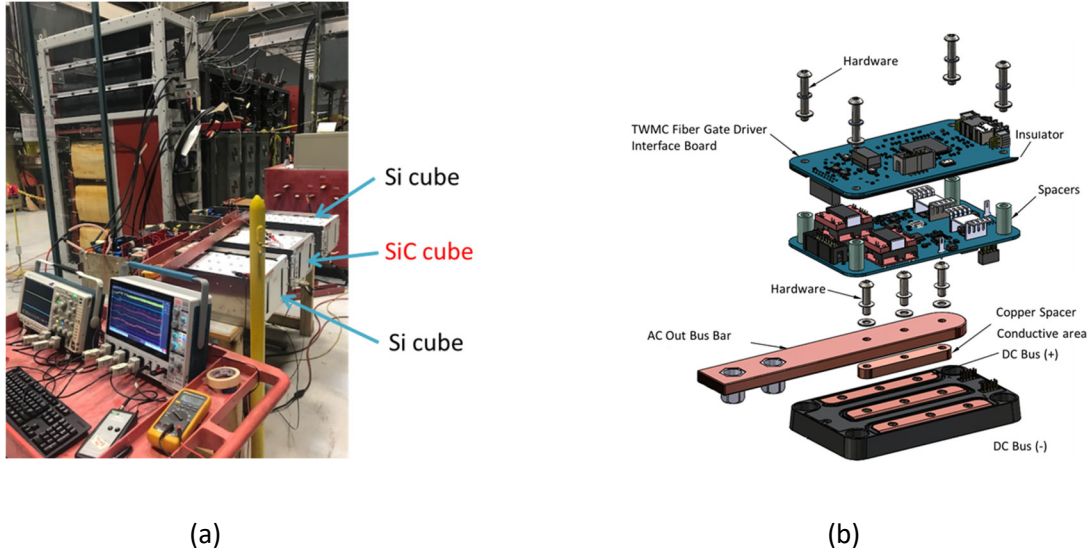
(a) Benchtop testing of the full SiC power cube and (b) the assembly of the SiC MOSFET, gate driver board and Fiber Optic Gate Driver Interface (FGDI) board used in the full SiC power cube design.
